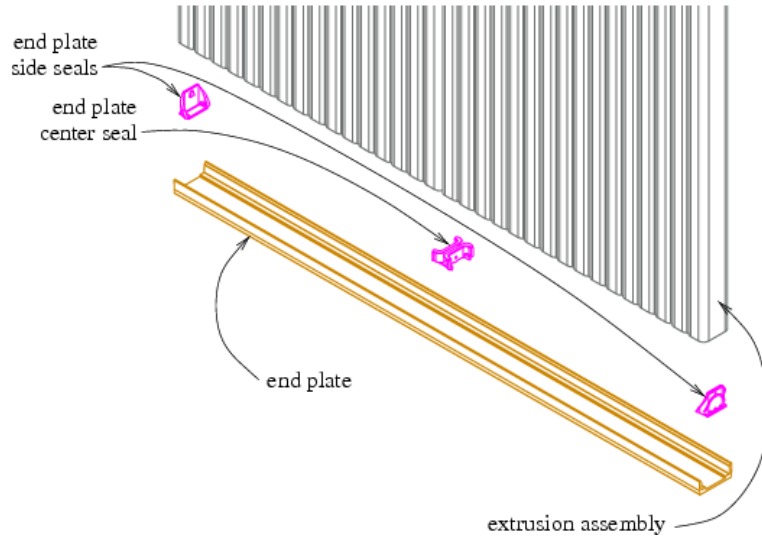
An exploded view of the end cap with side and center seals.[5]
